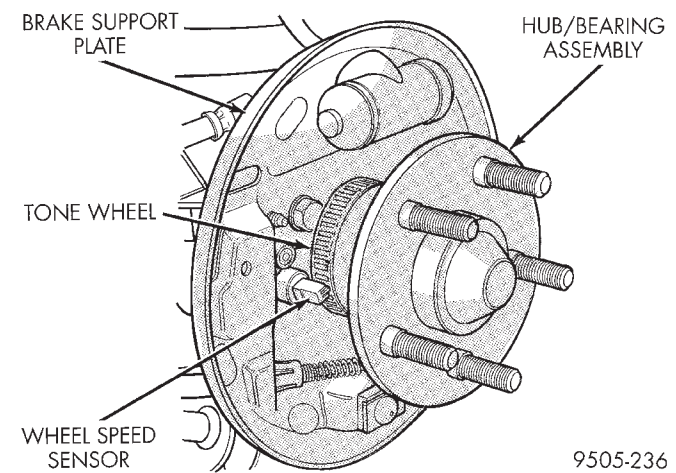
Rear Wheel Speed Sensor And Tone Wheel With Drum Brakes
